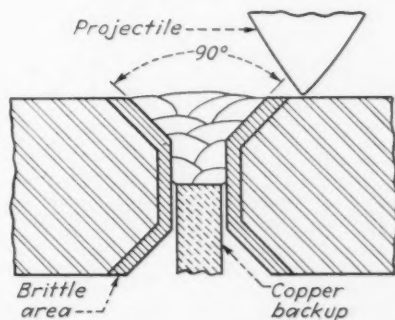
This type of weld also passed the shock test for the same reason as given in Fig. 12.
